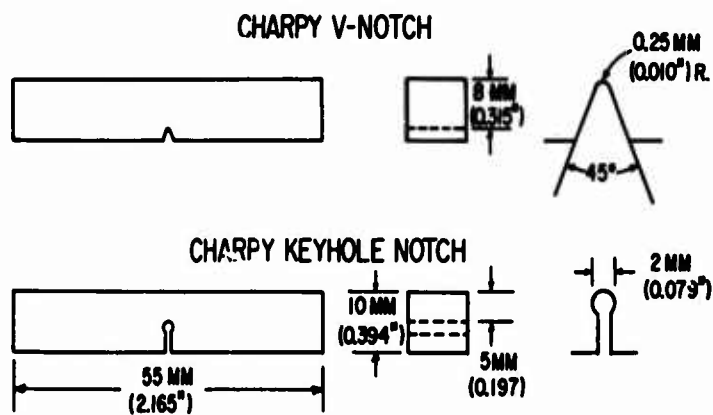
Dimensions of Charpy-V and Charpy-Keyhole tests
